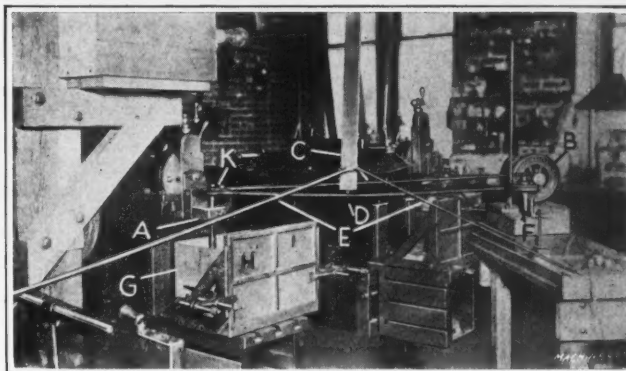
Set-up, showing Method of employing Shaper to mill the Pattern
